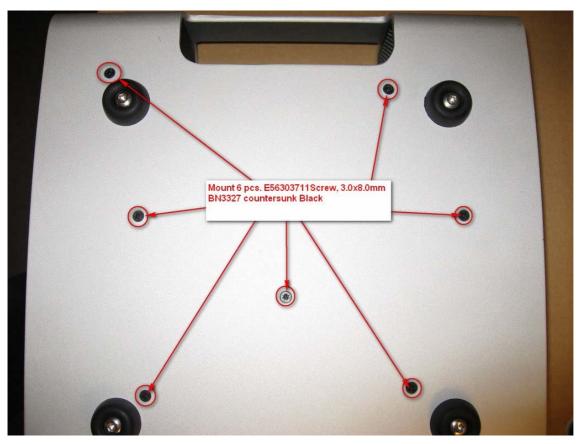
Mount the top cover to the inner box using seven screws as shown in the picture.
